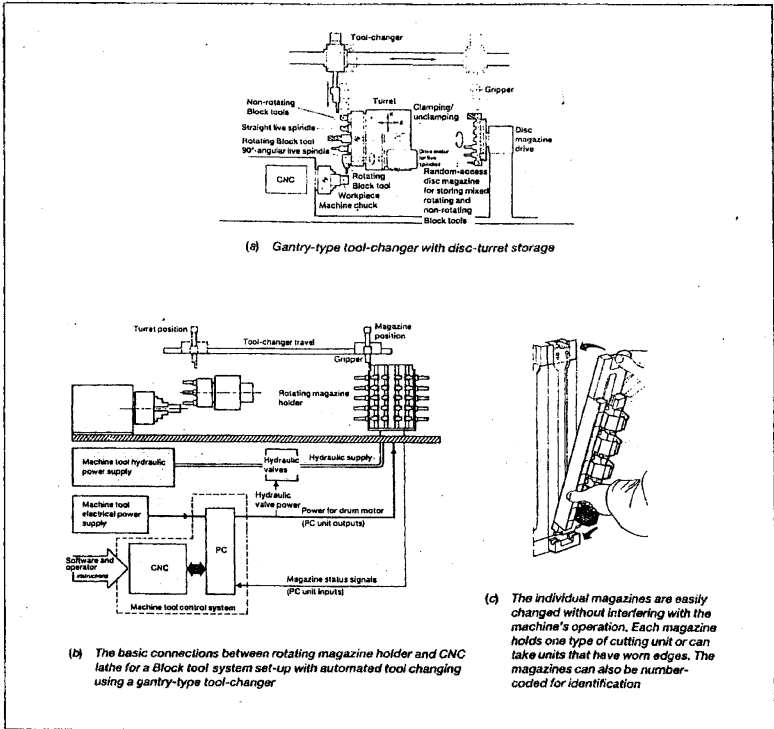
The automated Block tool-handling system with a gantry-type tool-changer and tool-storage drum (Courtesy of Sandvik (UK) Ltd.)
